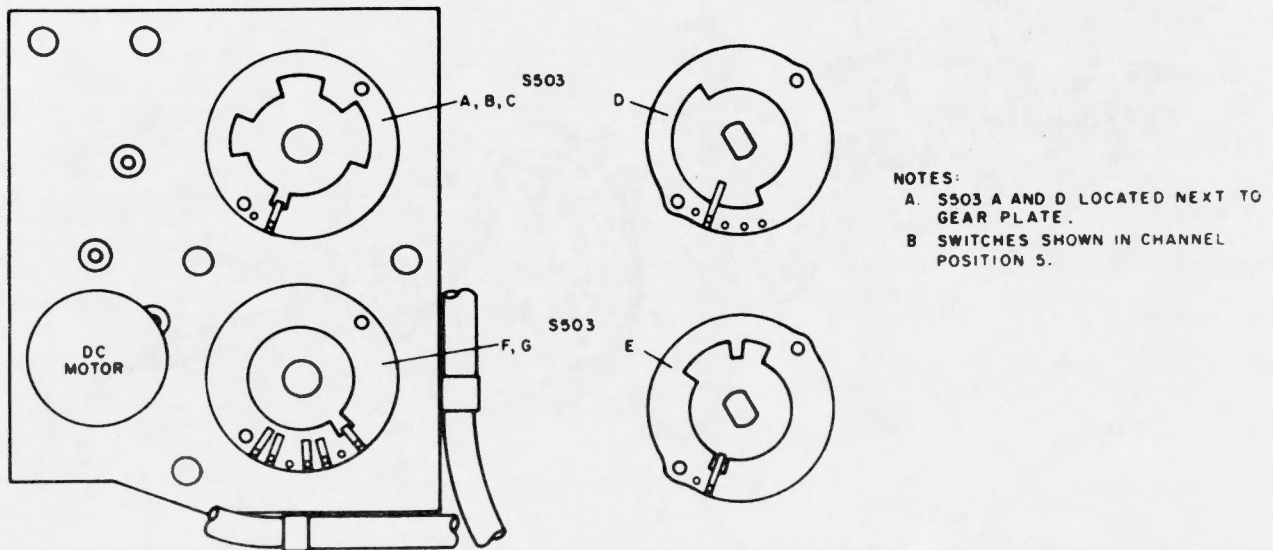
AM-1565/URC, Autopositioner, Switch Section Orientation
